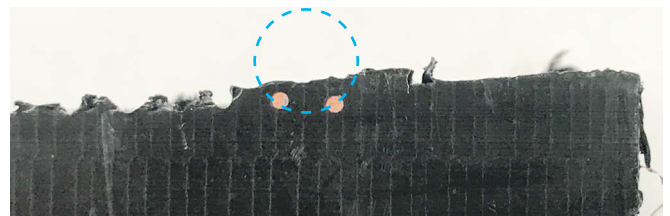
Close-up of EF coupler socket root showing brittle fracture at the fusion interface for the last two wires (circled above).
